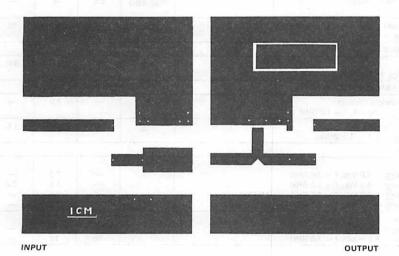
PRINTED CIRCUIT BOARD LAYOUT
